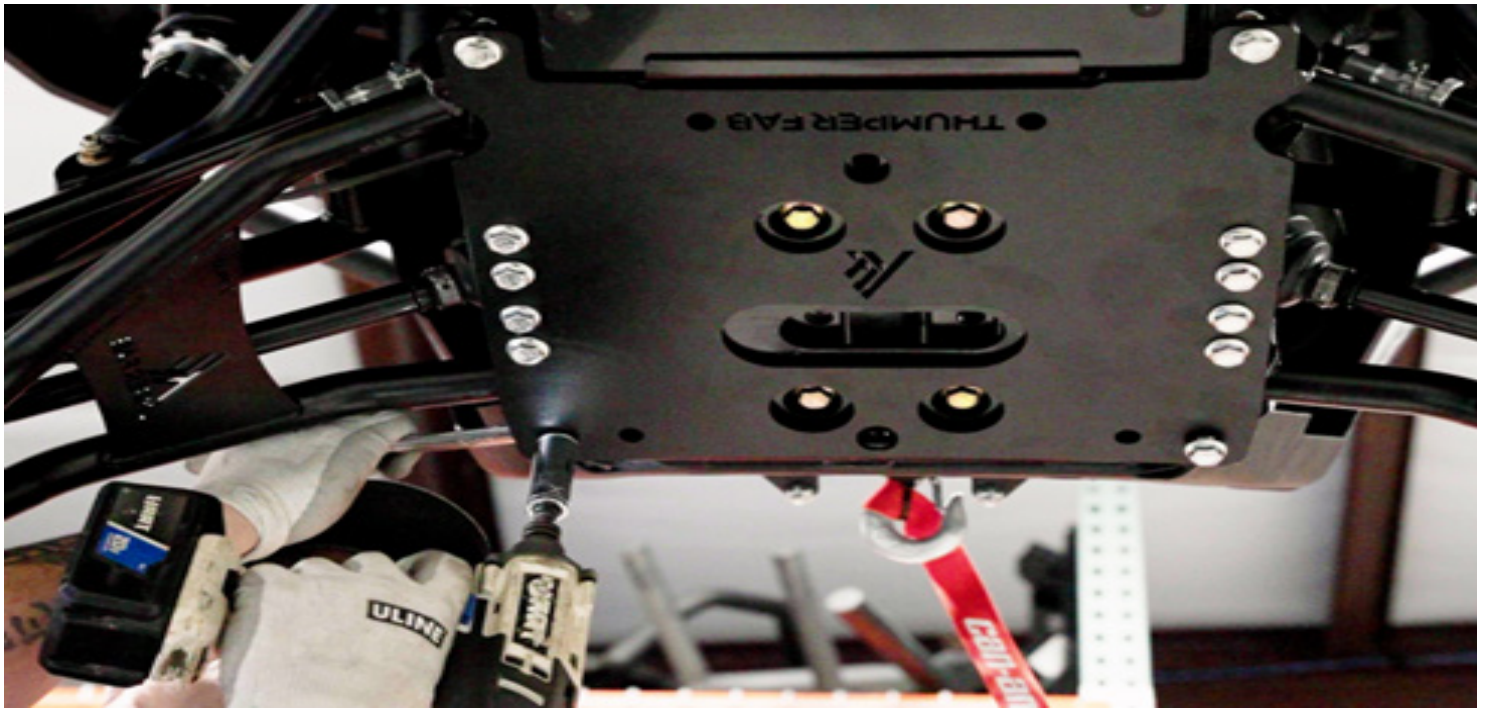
Fasten M10-1.5x25mm Flange Head Bolts using 15mm Socket and 15mm Wrench
